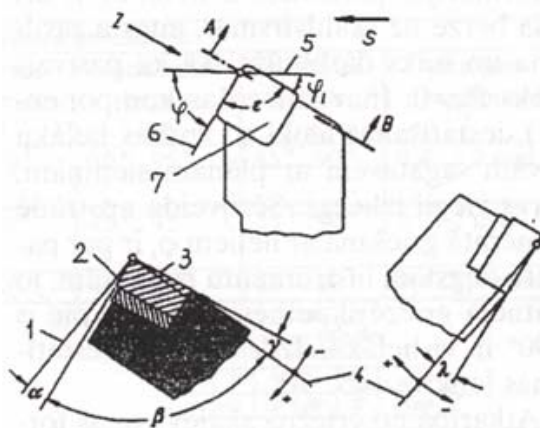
Negative cutting insert geometry ( 1- tool cutting edge plane, 2- back plane, 3- chip breaker plane, 5- work plane, 6- cutting edge plane, 7- cutting insert,  $\lambda$ - chip breaker plane,  $\alpha$ - back plane angle,  $\beta$ - cutting insert base angle,  $\square$ - main cutting edge angle,  $\lambda$ - cutting edge angle).
